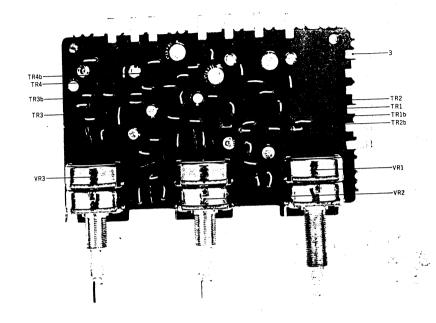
PHOTO OF RESISTOR P.C. BOARD (98-5060)
